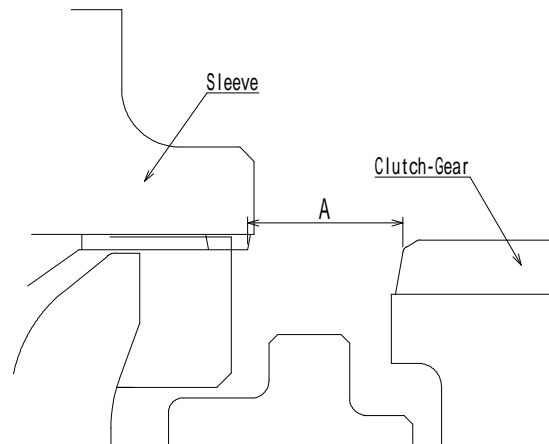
Sleeve Stroke Until Engaging with The Clutch-Gear
